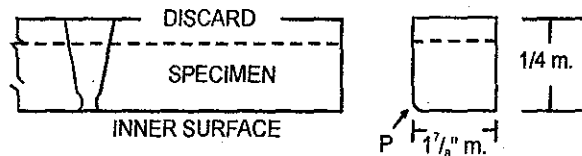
TENSILE TEST ALL-WELD METAL
